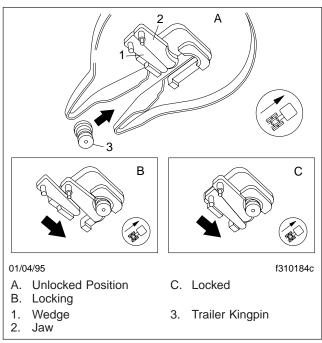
, Fontaine Kingpin Lock Mechanism
